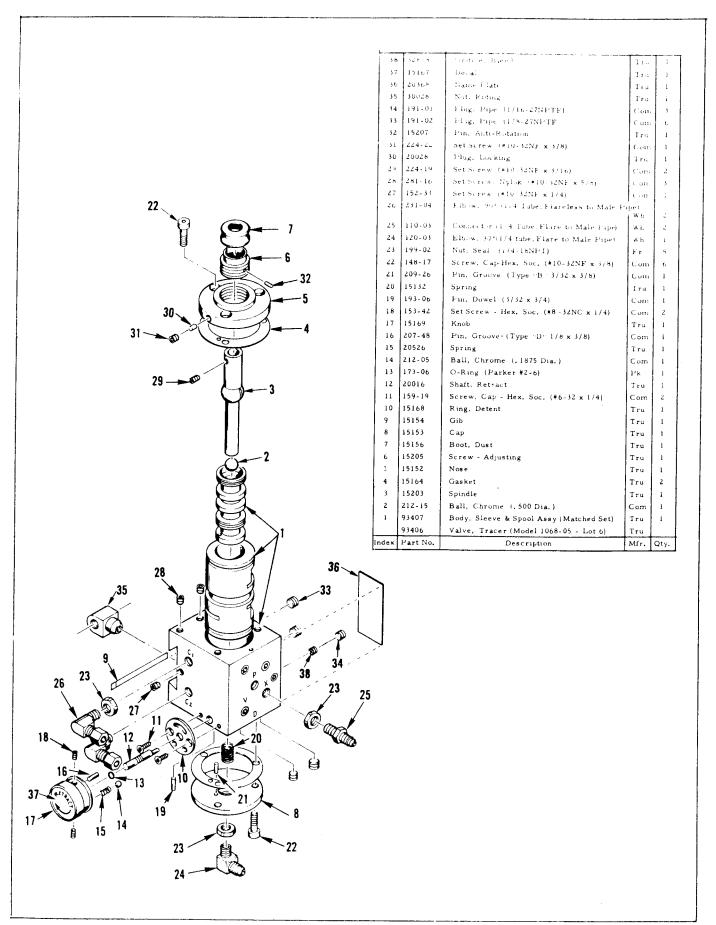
Exploded View and Replaceable Parts List for Model 1068-05 Tracer Valve. (Used with Mark "O-A" Series)
